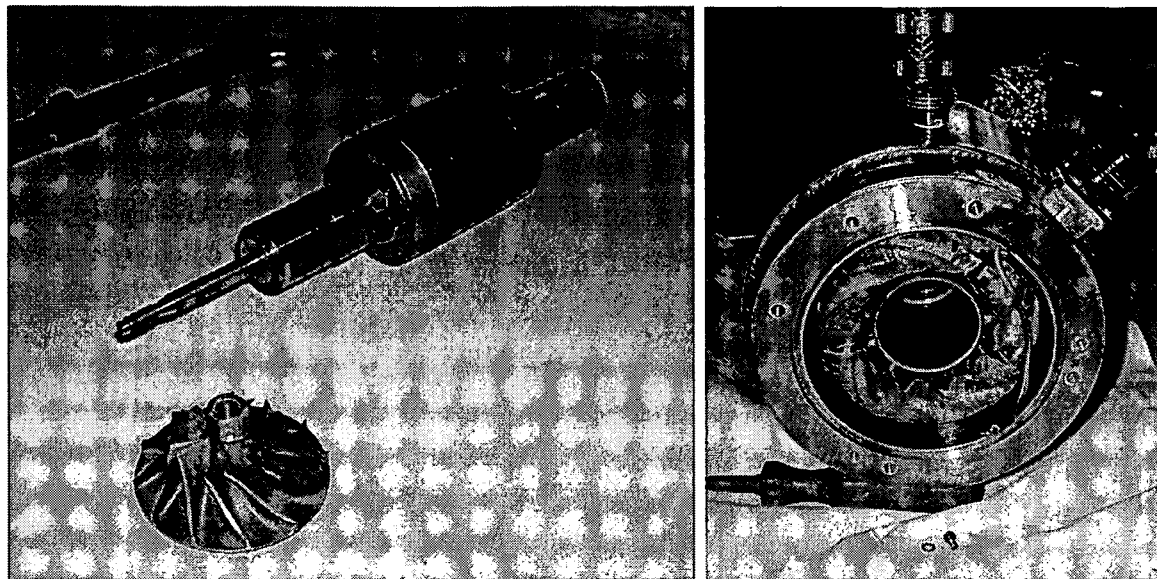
left:* Rotor shaft of the АТЕКО turbine with the dismantled blade wheel. *right:* Opened body of the turbine seen from the side of the thrust bearing. The stator windings and the separation sleeve are visible.
